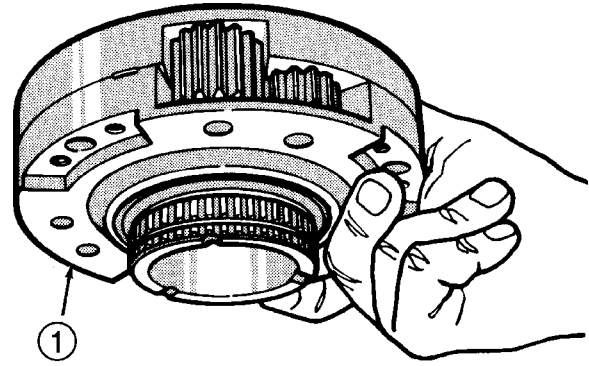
Installing Mainshaft Bearing Rollers and Spacers
